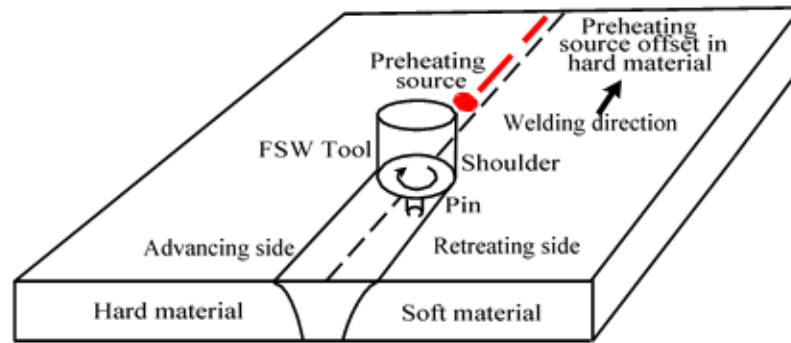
Basic principle of plasma-assisted friction stir welding of dissimilar joint
